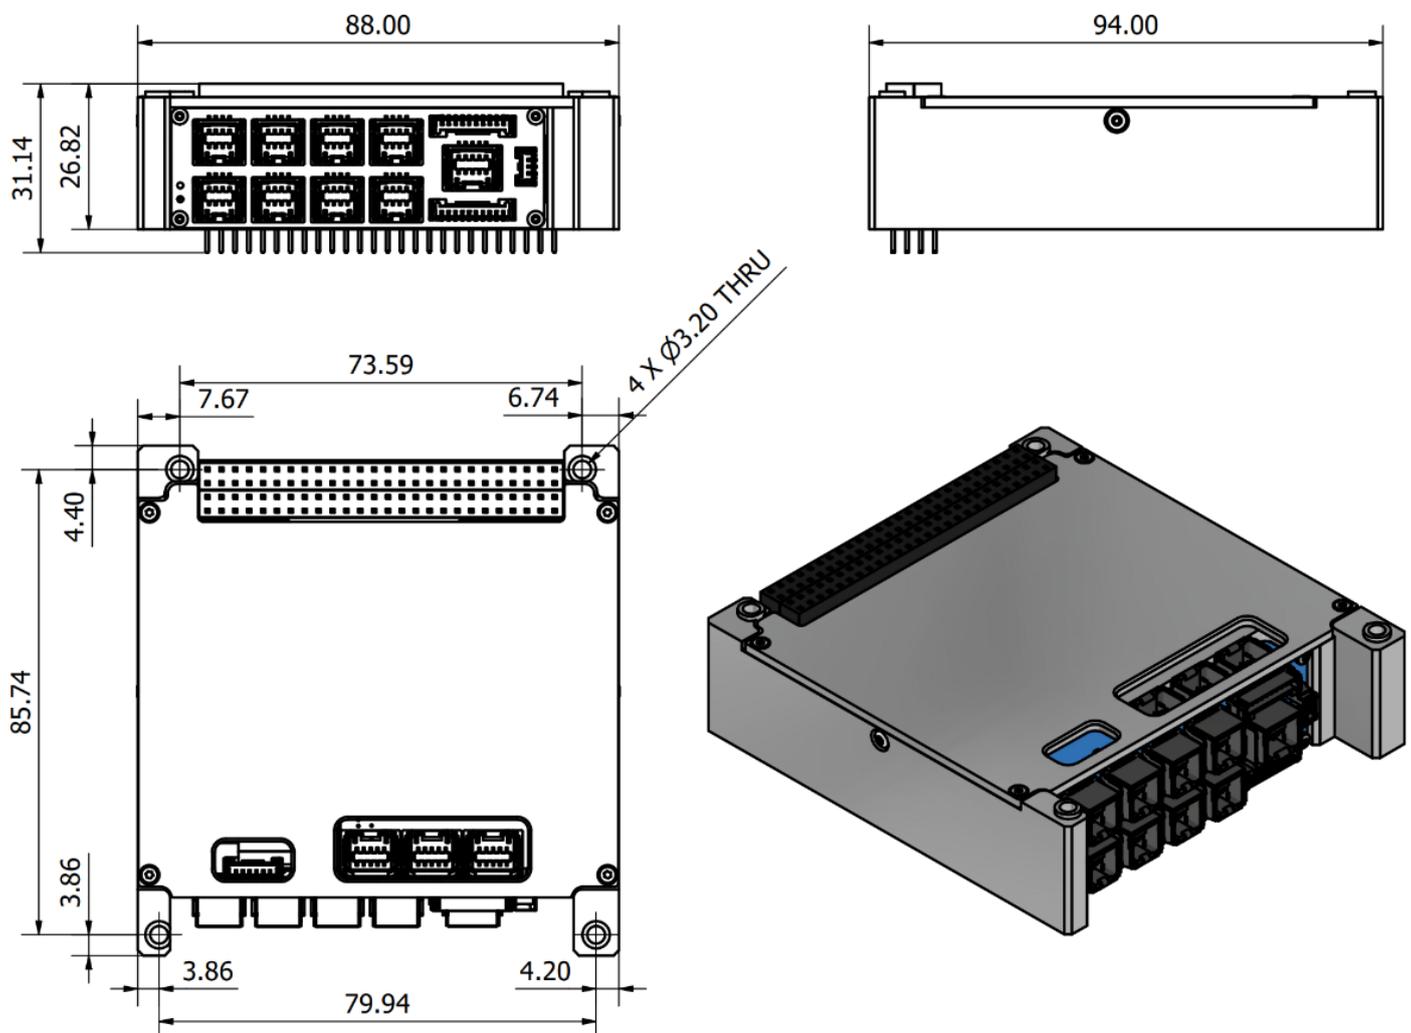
Indicative Dimensions of the Standard PC104 CubeADCS Core
